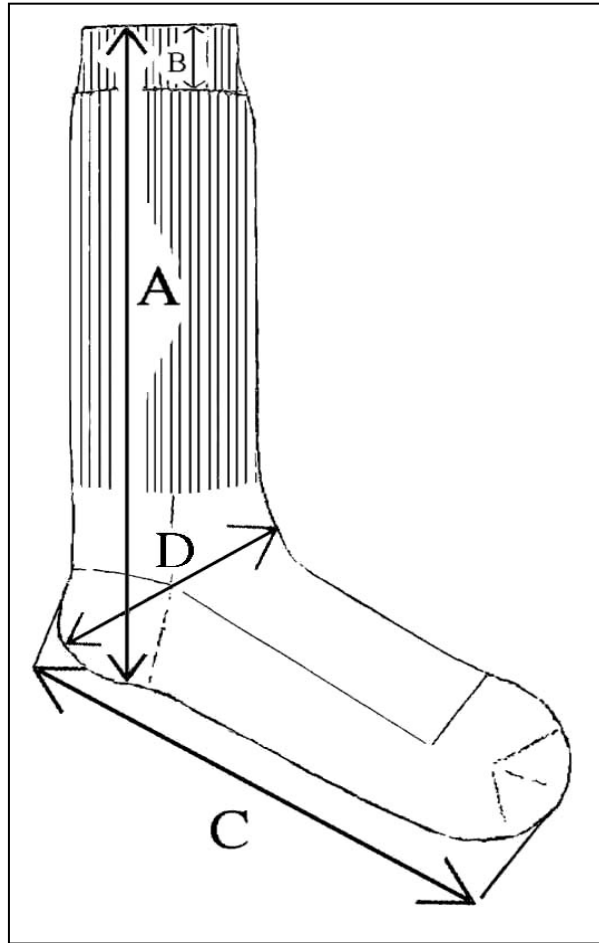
SIDE VIEW OF SOCK BOOT.
